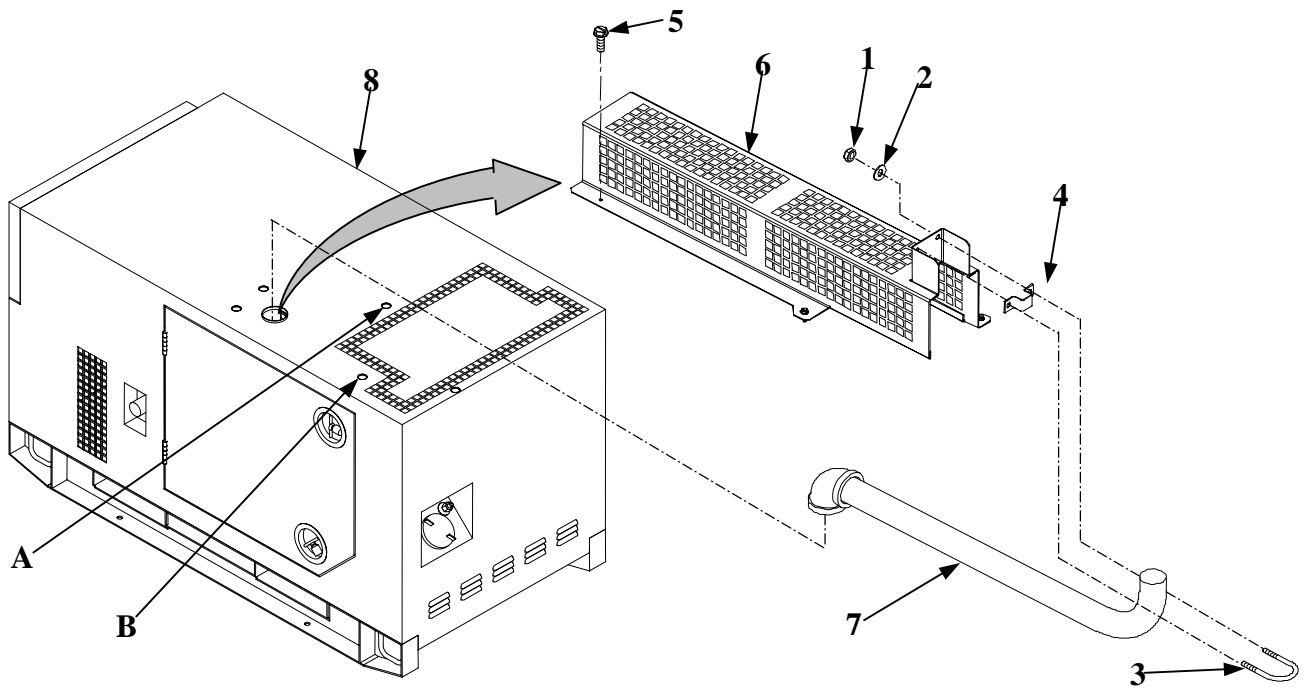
Generator Set Exhaust Exhaust Removal/Installation
